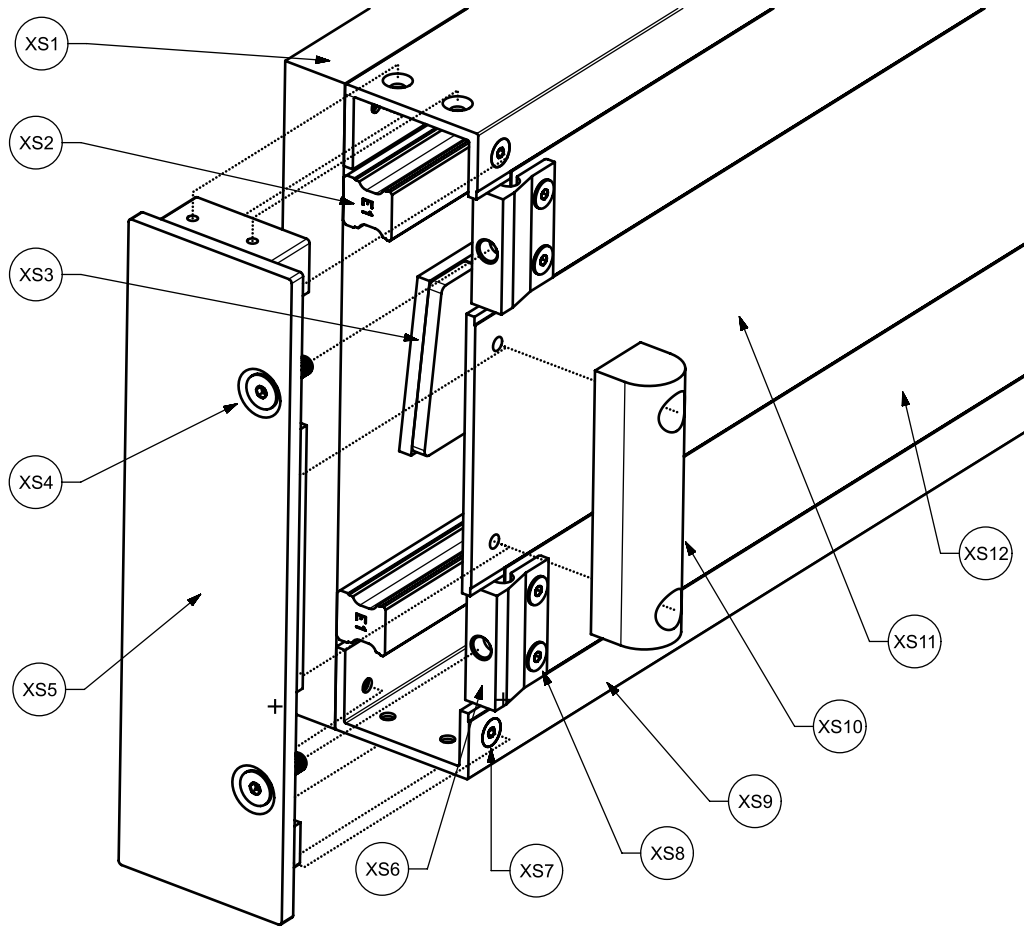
Partially exploded view of the fixed part of the horizontal stage (XS) with: honeycomb rear panel (XS1), rail (XS2), magnet track (XS3), strip tension adjustment screw (XS4), end-plate (XS5), strip-clamp (XS6), end-plate mounting screw (XS7), strip mounting screw (XS8), side profile (XS9), bumper (XS10), center plate (XS11), and strip (XS12).
